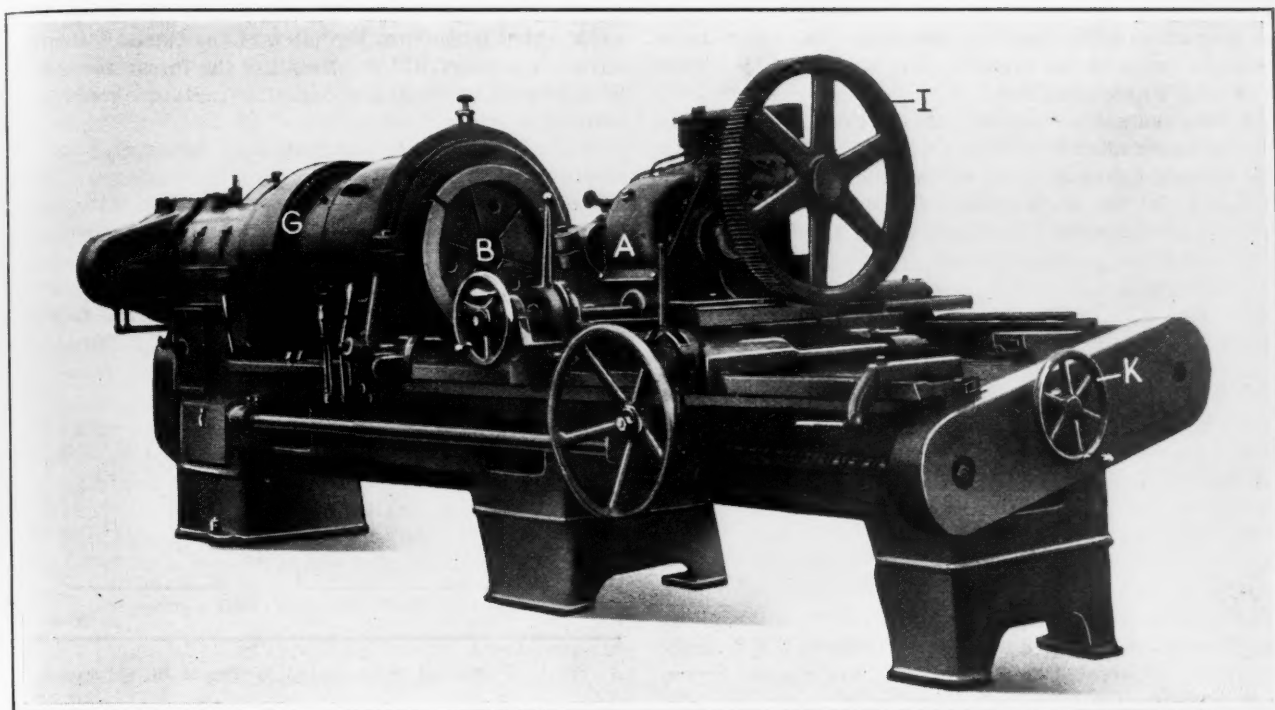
Thread Milling Machine designed for threading Pipe of Any Length and Any Size up to 10 Inches in Diameter
